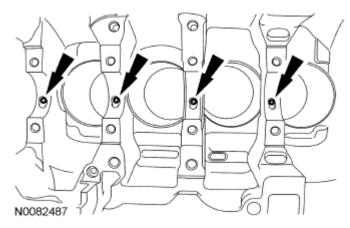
Locating Oil Squirts Courtesy of FORD MOTOR CO.
